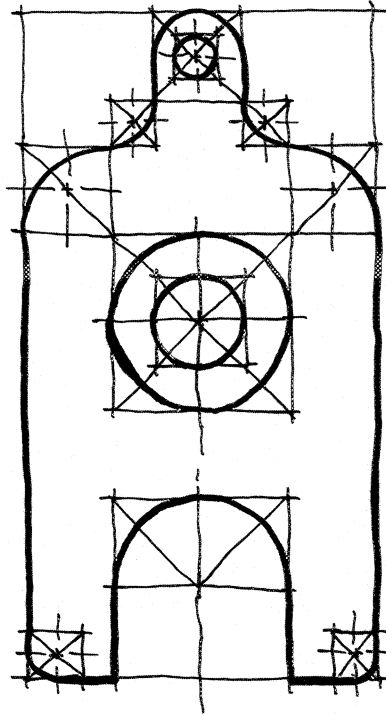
Blocking Out Circular Shapes When Sketching
